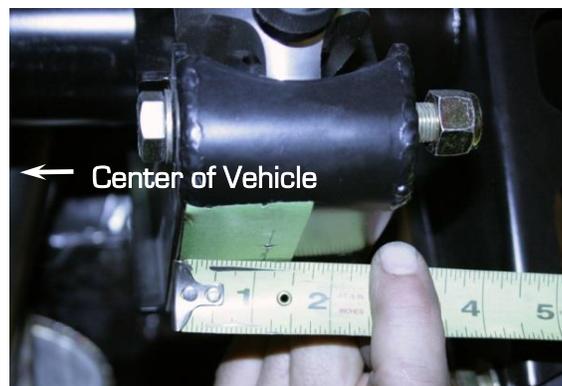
Measuring from the Inboard Edge (Passenger Side Shown)
